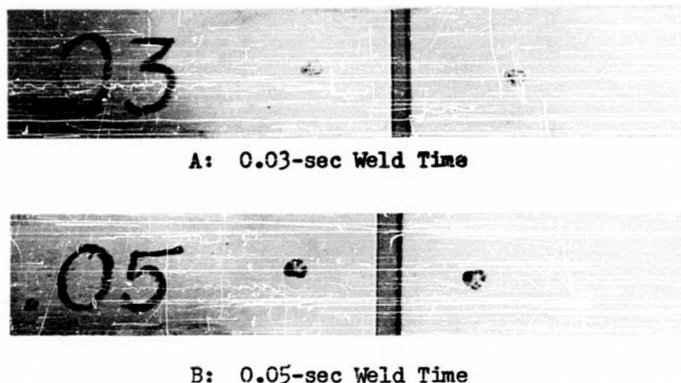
SAMPLE WELDS BETWEEN STRIPS OF TYPE 302 STAINLESS STEEL
